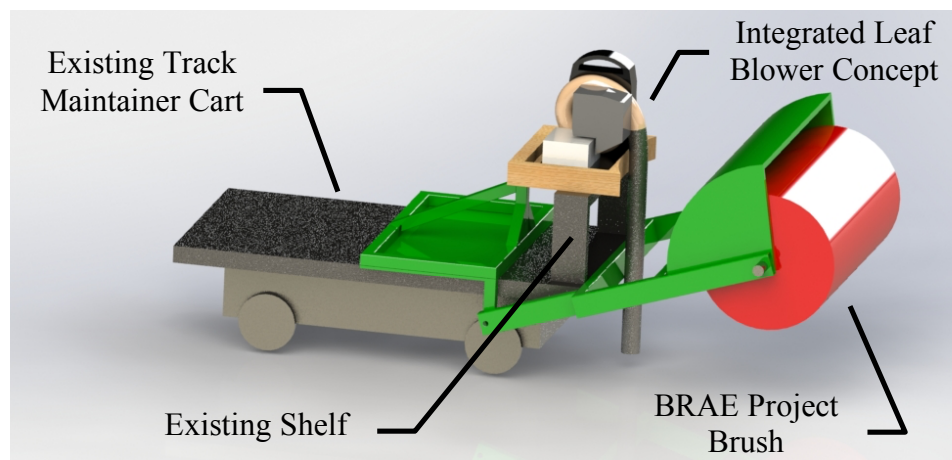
A concept rendering of the leaf blower when mounted onto the cart using the steel shelf as the mounting surface. It is shown alongside the BRAE brush project formed using dimensions from their technical document.
